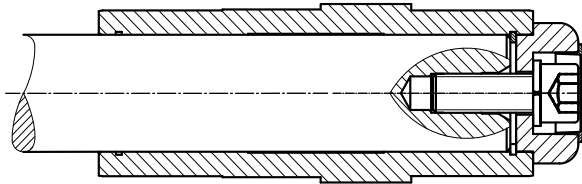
Gear unit mounted to shaft without a shoulder using the fastening element
